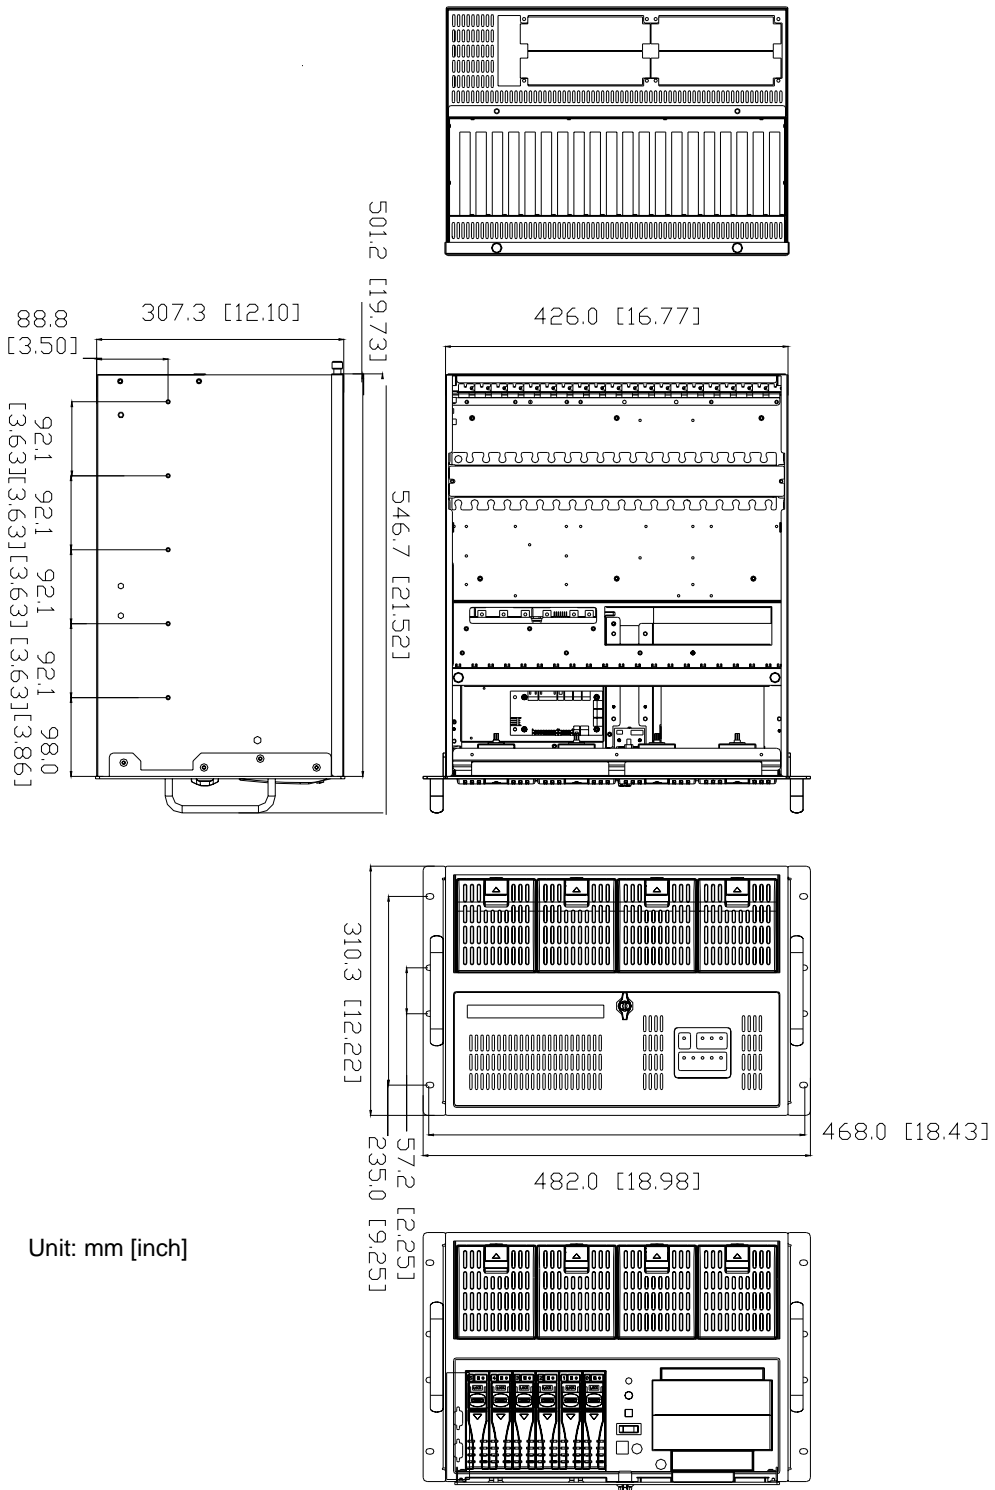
Dimension diagram/ 产品尺寸 / 產品尺寸
